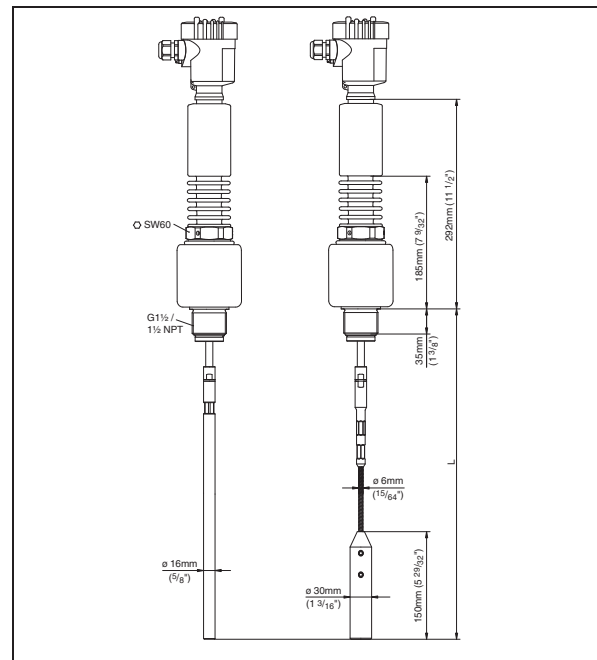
VEGAFLEX 66 - cable, rod version with thread (-200 ... +400 °C/-328 ... +752 °F)
